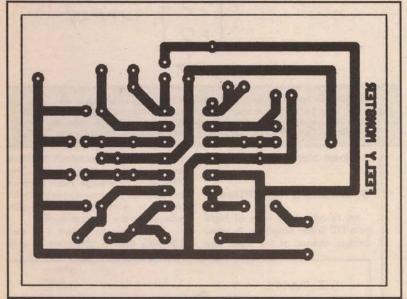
When you iron this image onto the blank PC board, the words "FEELY MONSTER" will appear correctly. The mirror image means you are looking at the component side of the board.
